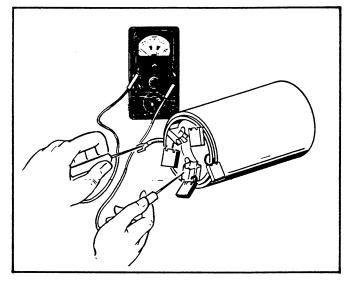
FIELD COIL OPEN CIRCUIT TEST
